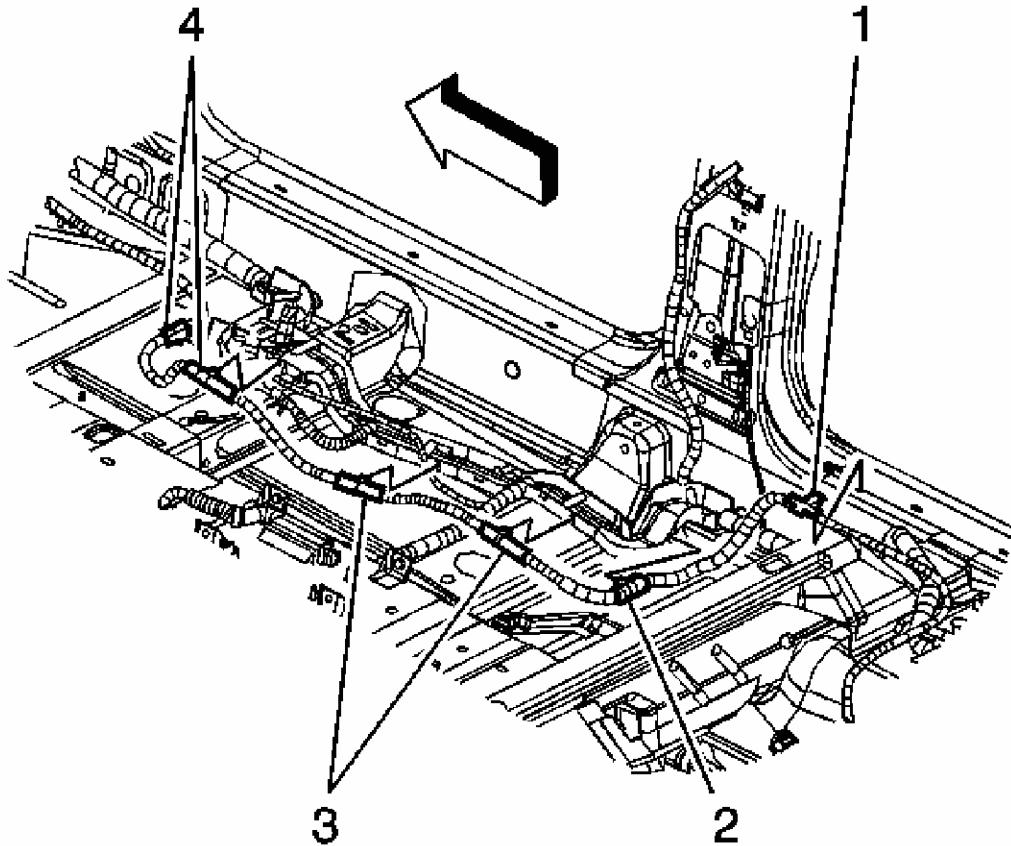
Removing/Installing Positive Battery Cable Retainer
